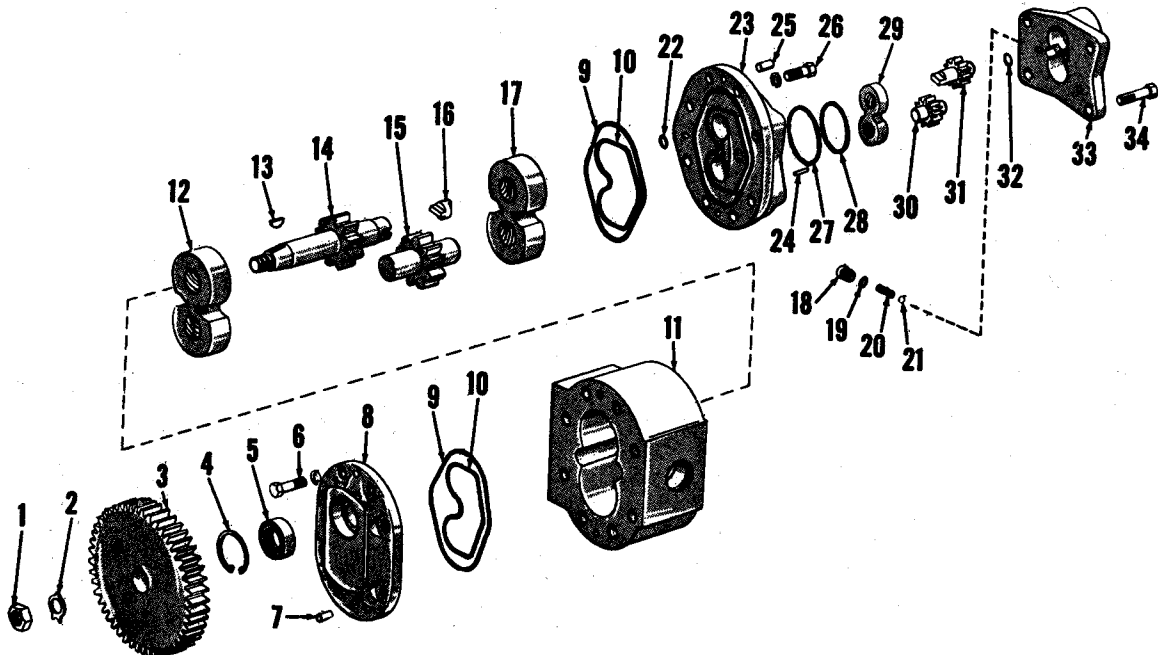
Exploded view of hydraulic pump assembly for all models except TW-10, TW-20 and TW-30. Pto pump gear (31) is driven by hydraulic system pump gear (14) via coupling (16). Only one bearing (29) is used on pto pump section; body (33) serves as rear bearing.
